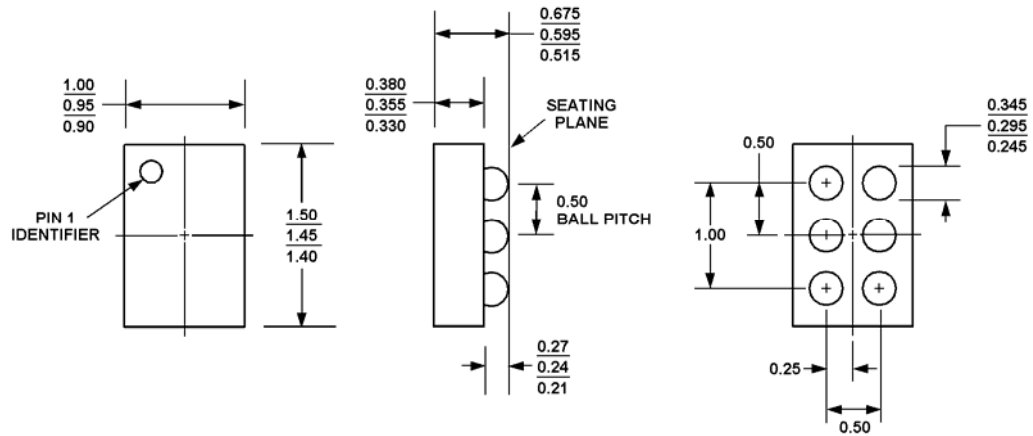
6-Lead Wafer-level Chip Scale Package
